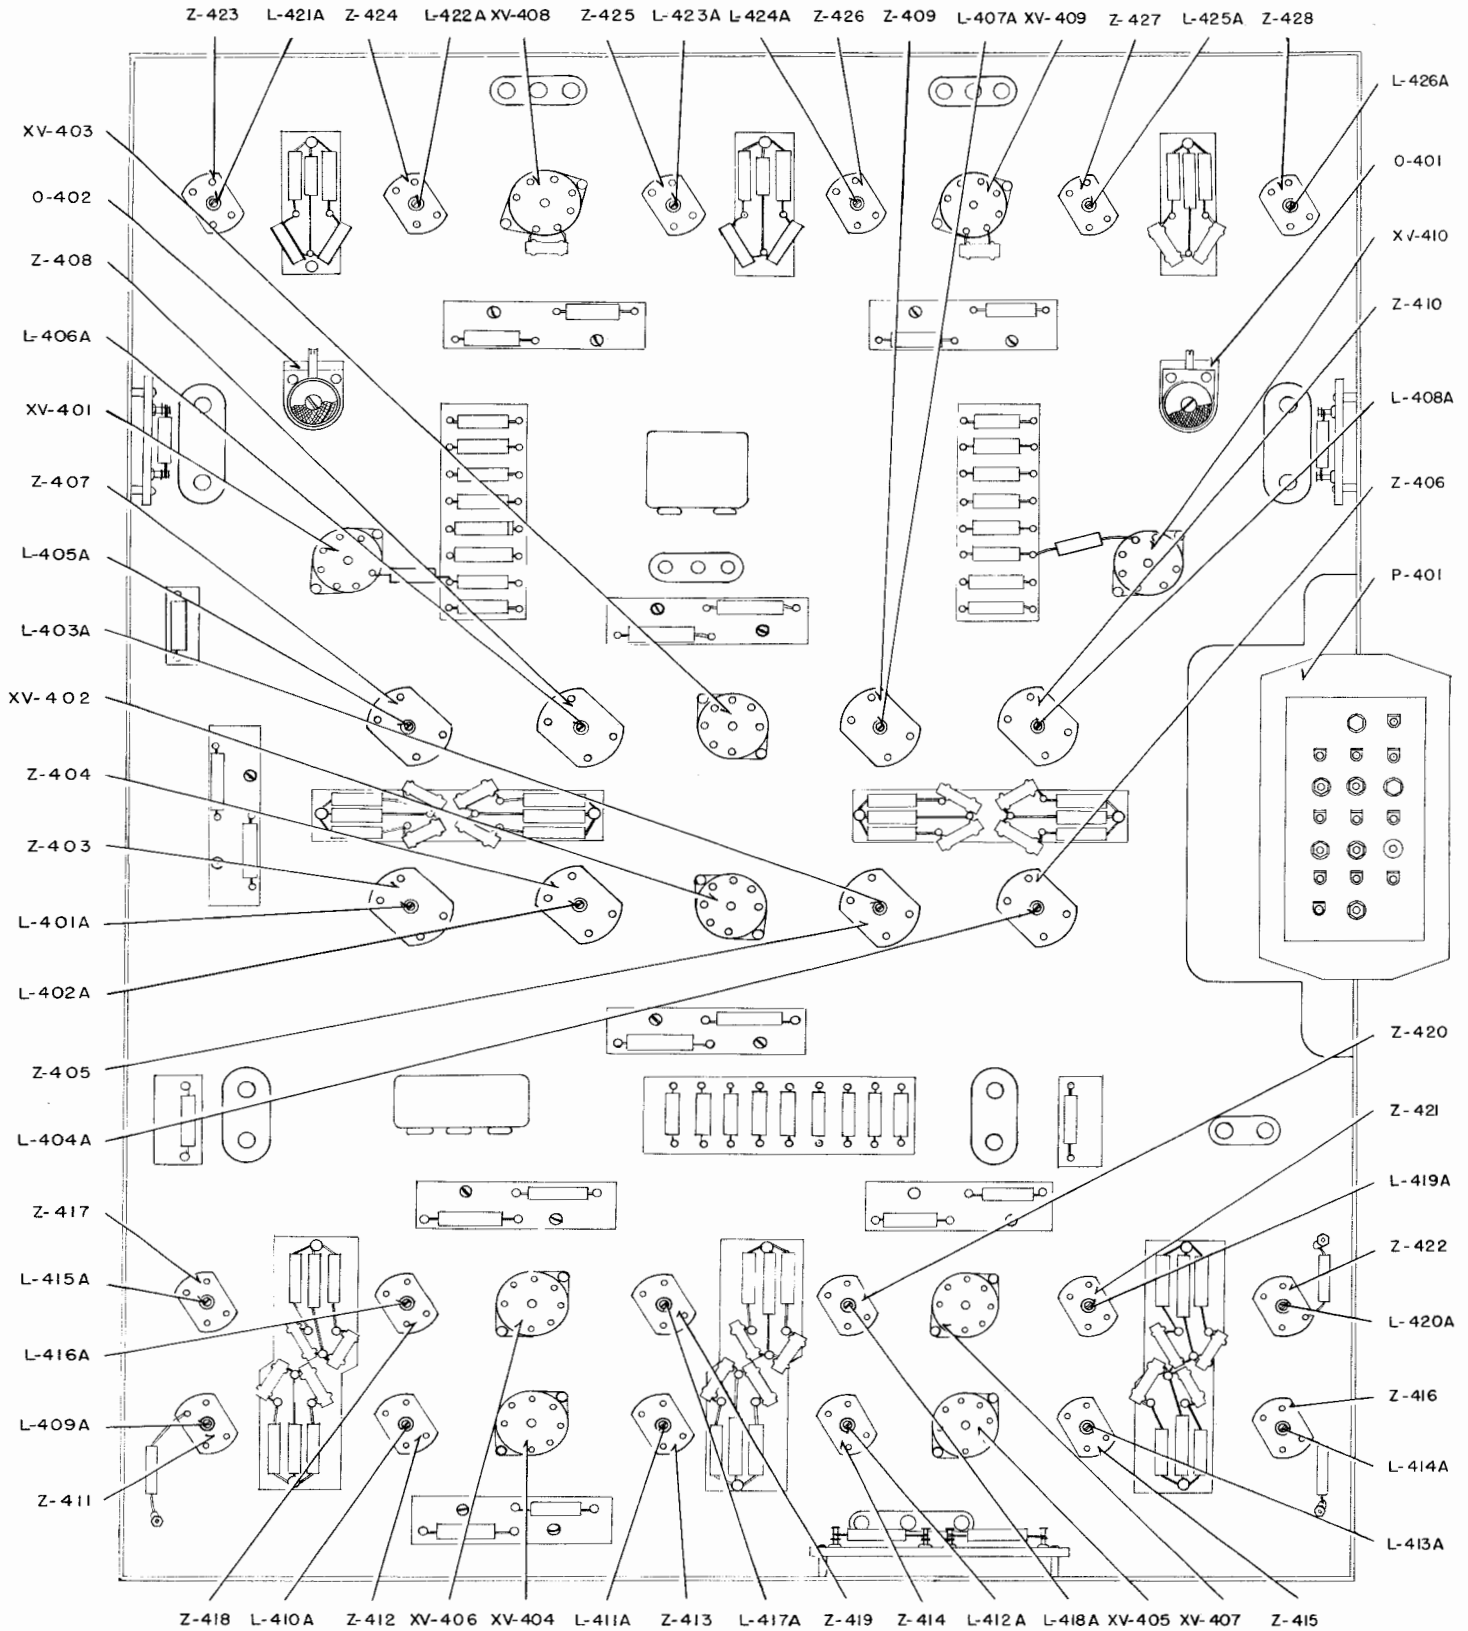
Miscellaneous Component Locations Bottom of Chassis, Filter Assembly F-99/FRR-24
